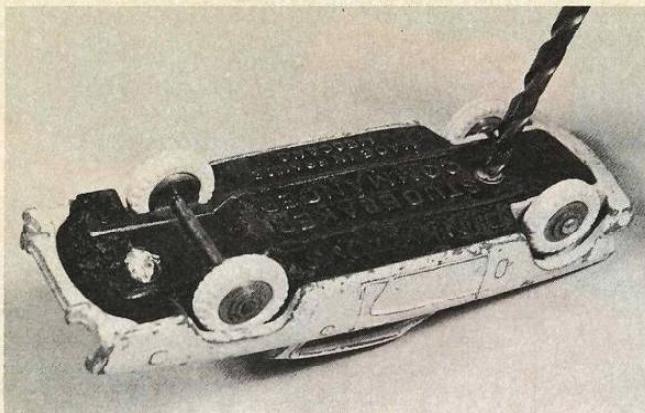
To disassemble the model, Wayne drilled out the flanges that attach the baseplate.
